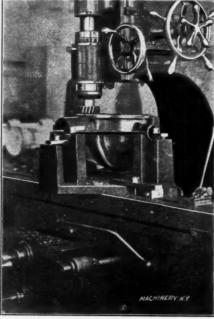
Facing Seats of Differential Covers in a Vertical Milling Machine
